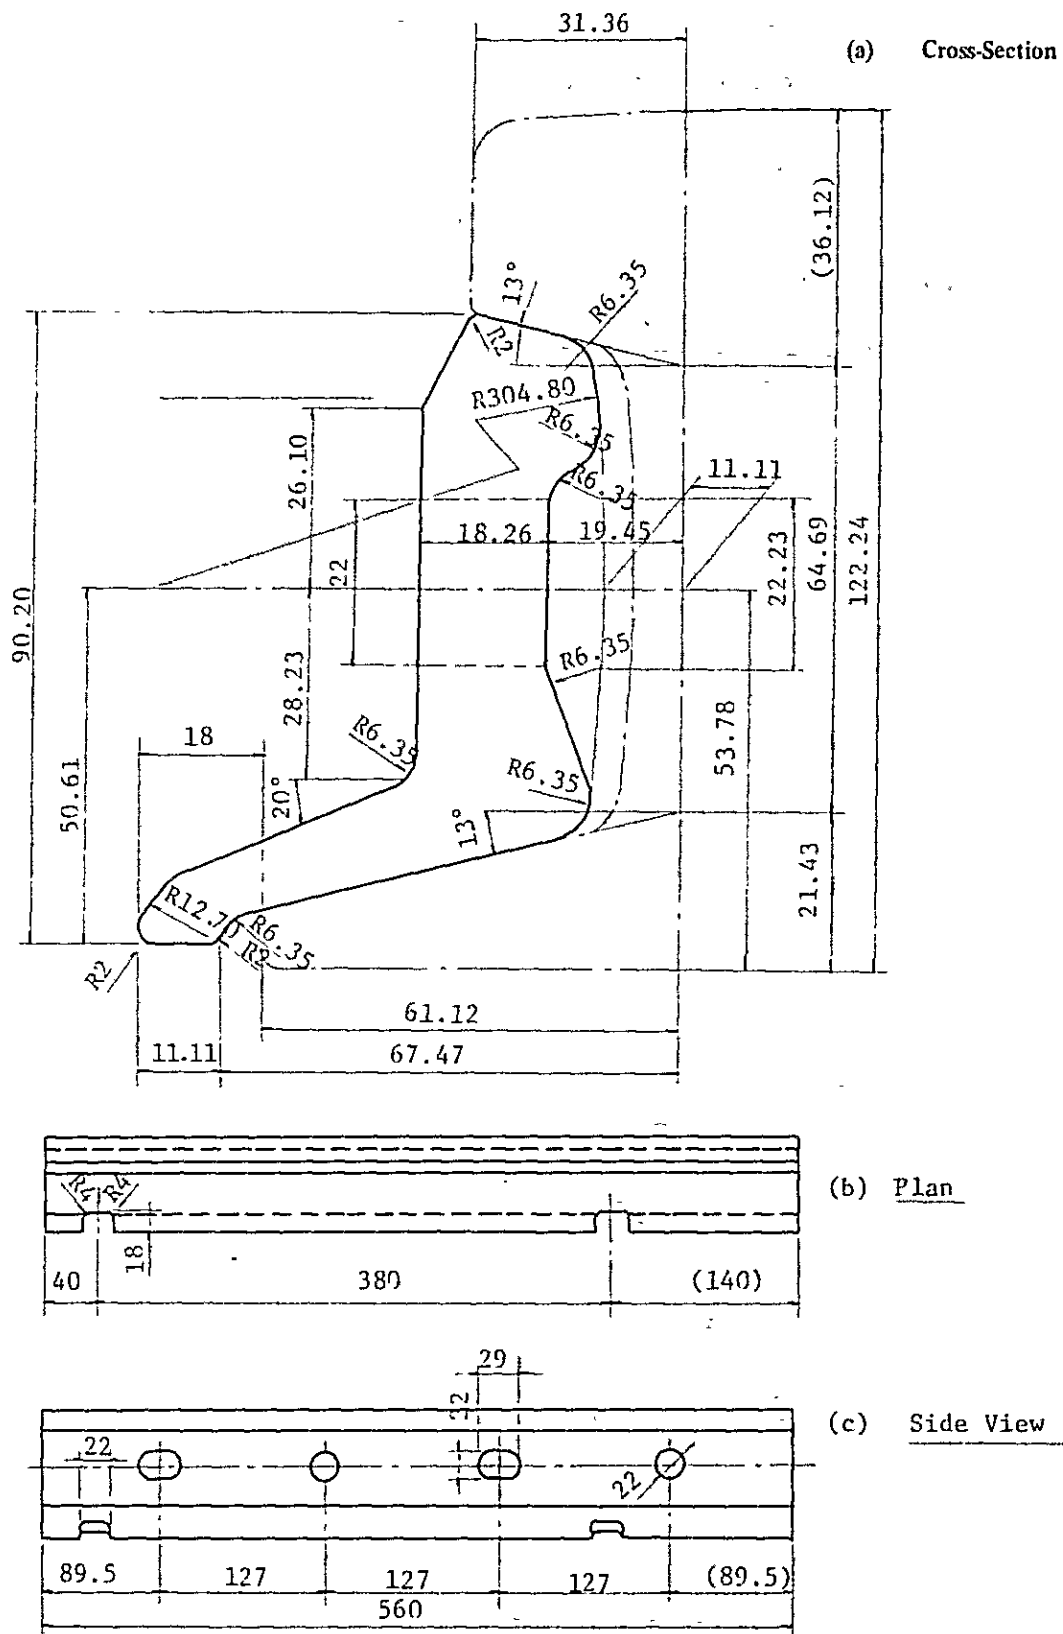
Standard Dimensions of Joint Bar (Unit: mm)
